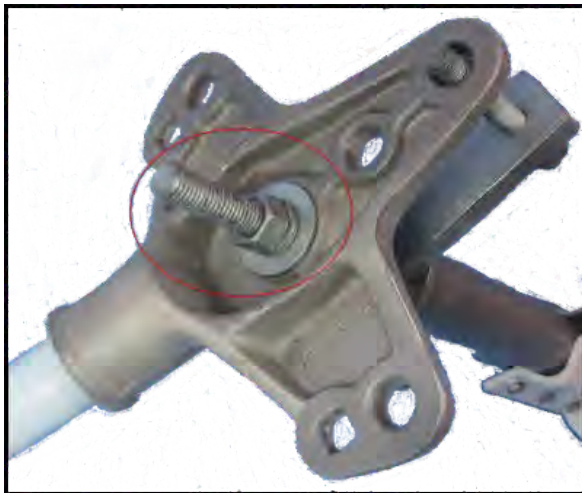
Nut and washers on mounting pole; extension arm, and leveling bracket
